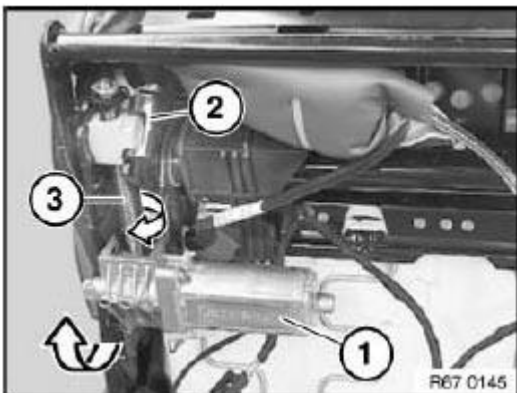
Twisting Out Drive Unit For Seat Tilt Adjustment Of Spindle
